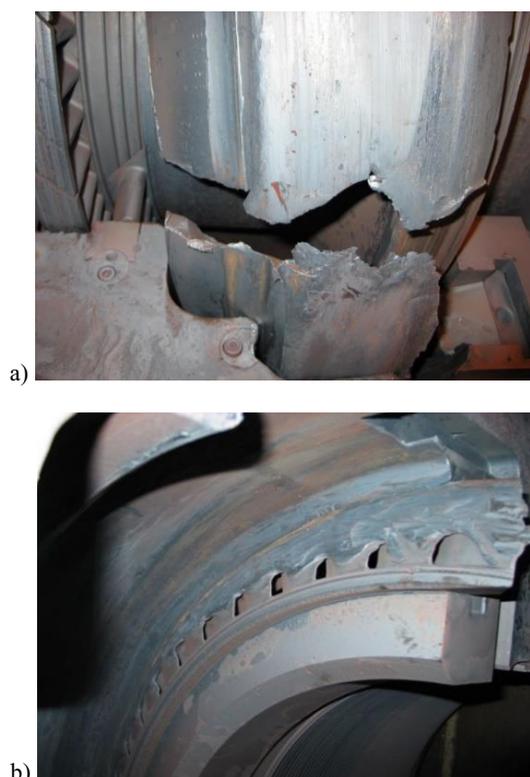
Damages of control stage chamber after the second failure: a) the casing protection ring – huge crash and displacement, b) the rotating wheel of control stage.
